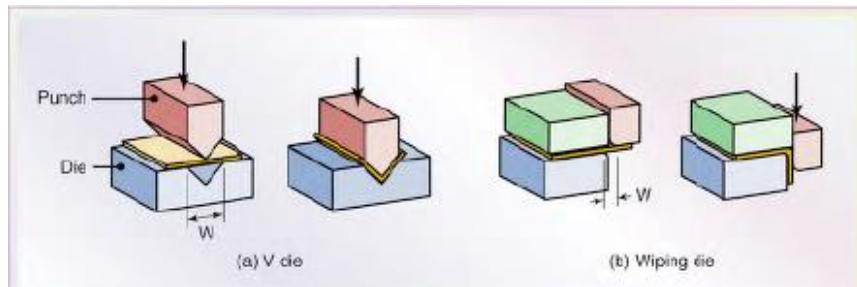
Common die-bending operations showing the die-opening dimension, W , used in calculating bending forces.
